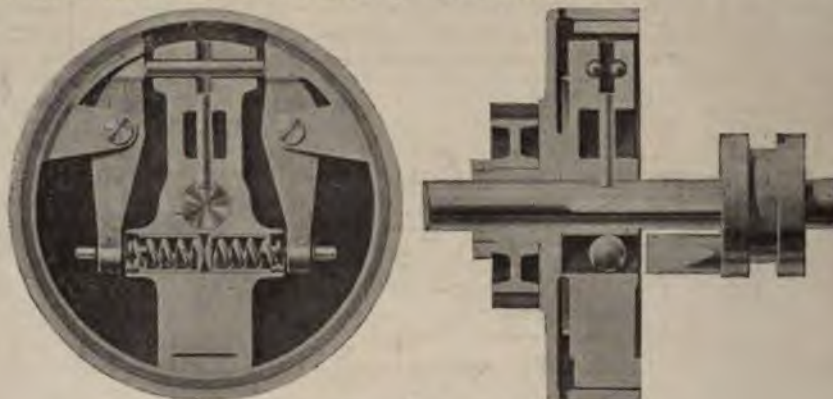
FRICTION CLUTCH AND SPEED CHANGING GEAR.
